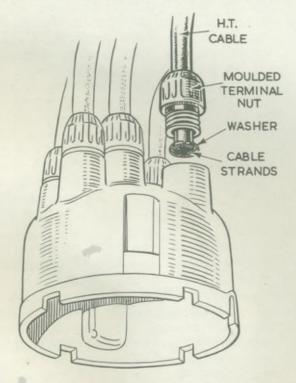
Method of fitting high tension cables to distributor moulding (and to ignition coil)
